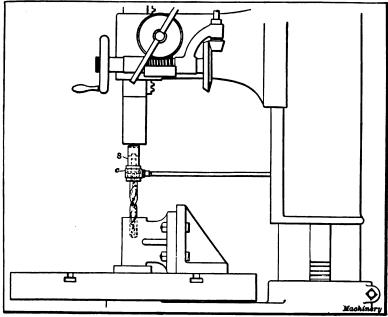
Method of Applying Oil-tube Drill to Drill-press
